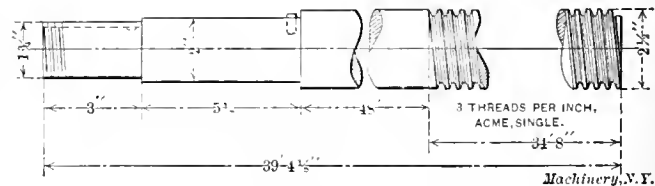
Detail of Lead-screw for Pratt & Whitney No. 3 Gun-barrel Drilling Machine.
